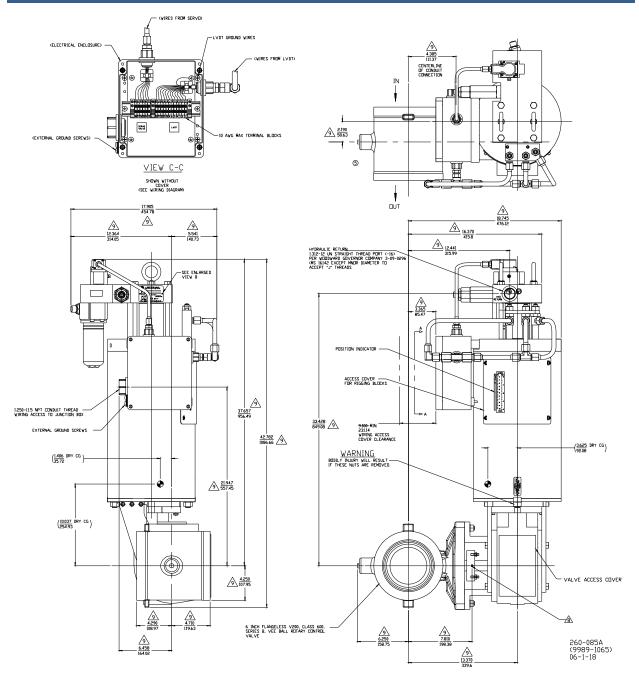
Gas Stop/Ratio Valve Outline Drawing (6-inch, with 3 LVDTs, SS-260)
